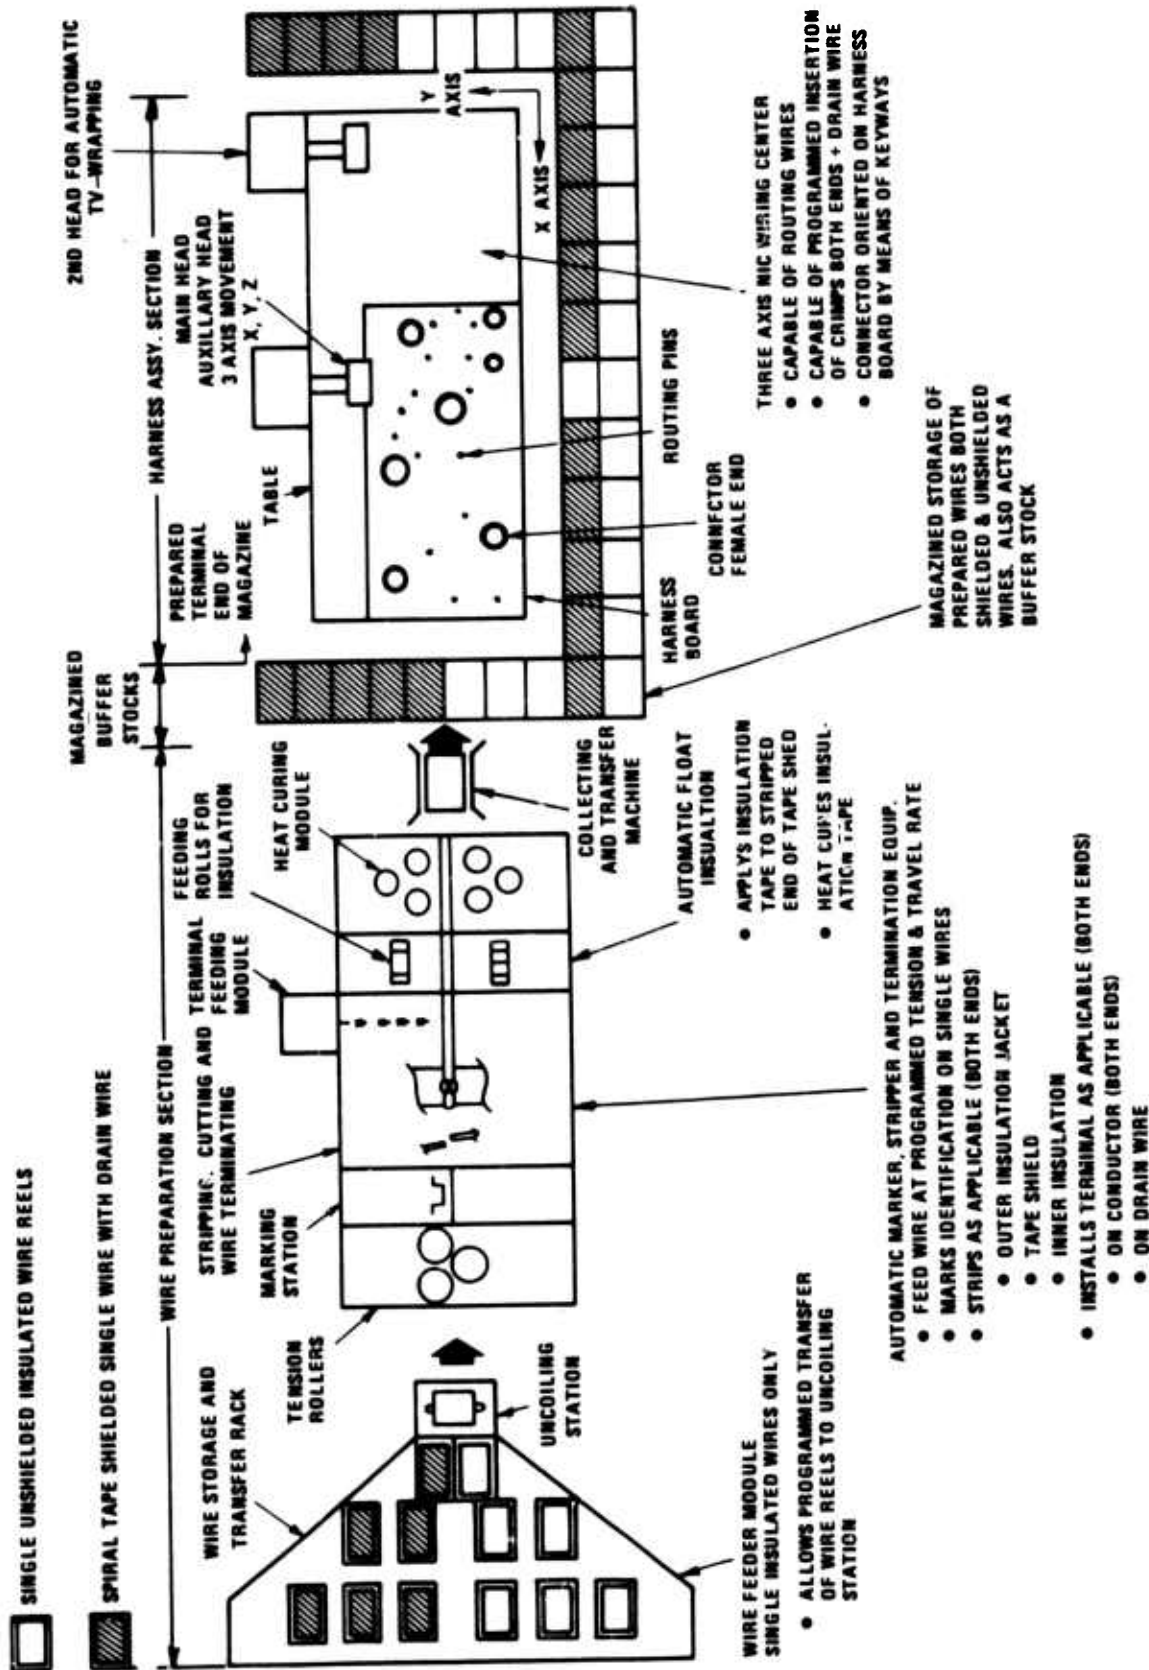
Preliminary Concept for a Largely Automated Harness Assembly Processing Line
